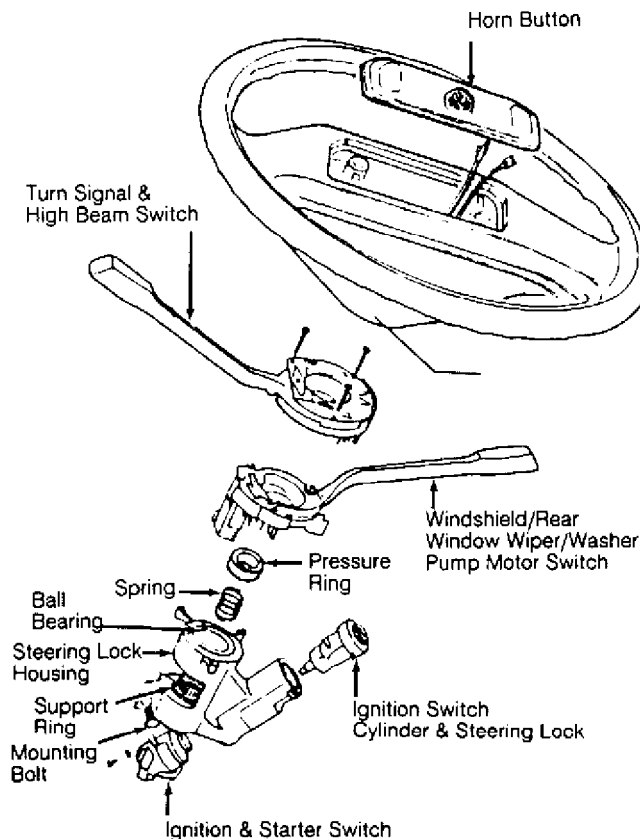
Typical Steering Wheel Components (Without Air Bag - Fox Shown; Others Are Similar)
